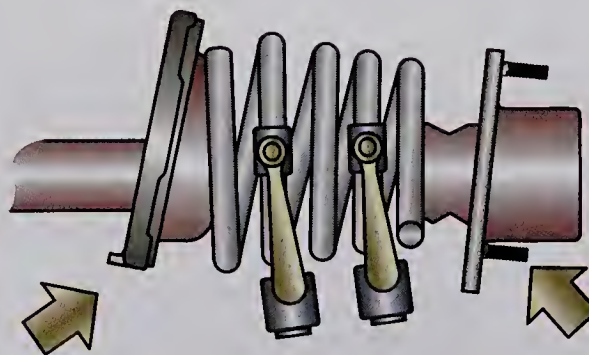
Aligning lowest bolt on upper strut mount with tab on lower spring seat.
